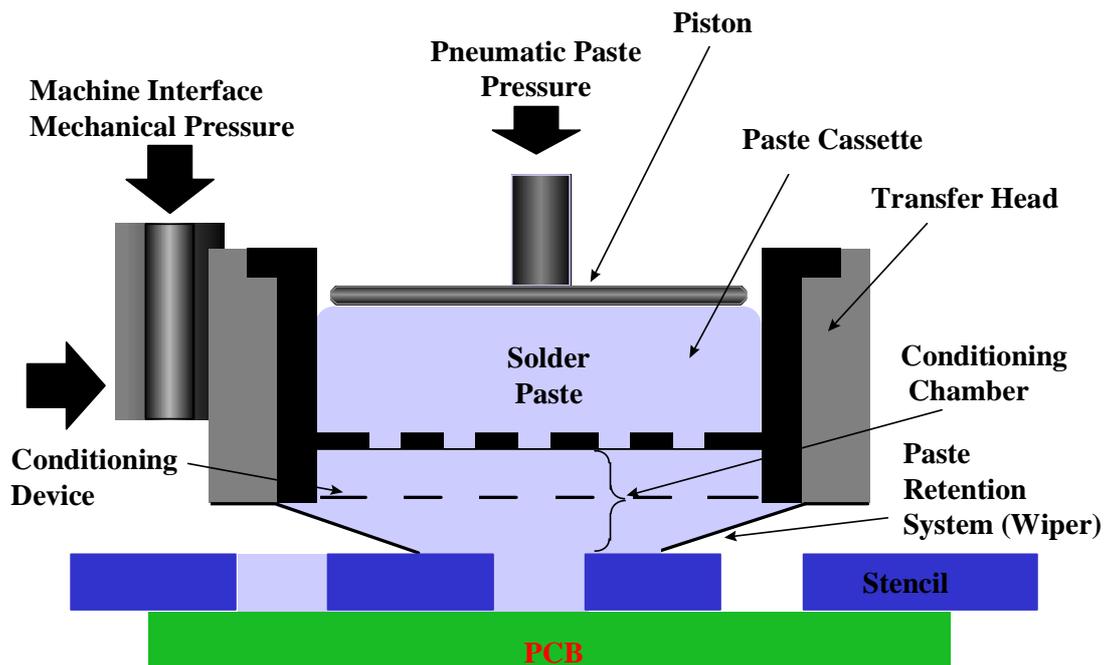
Schematic of enclosed print head (source : DEK Printing Machines)
